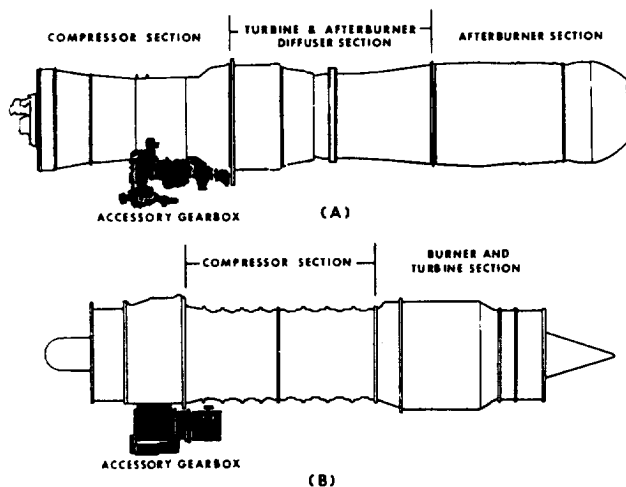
Accessory gearbox. (A) Mounted beneath the compressor; (B) mounted beneath the front bearing support.
